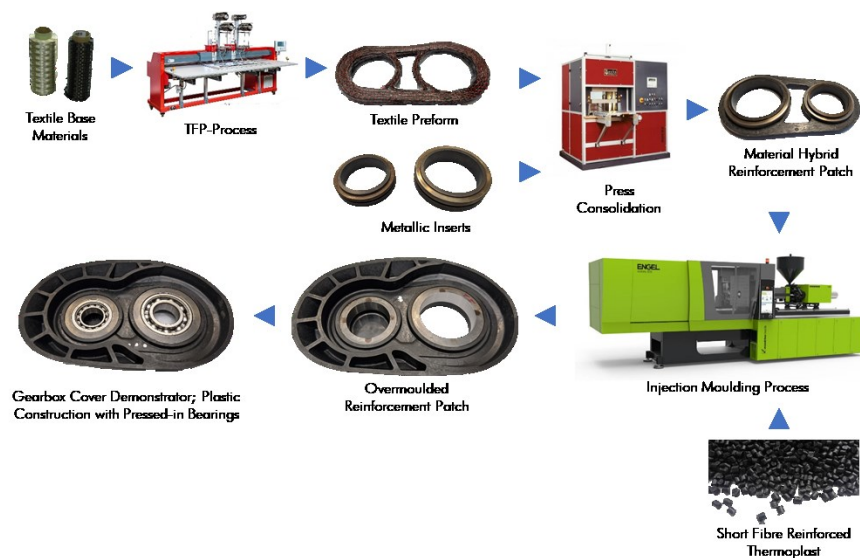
Process chain for manufacturing the gearbox cover consisting of short fibre reinforced thermoplastic and integrated hybrid material patch based on endless fibres on a test specimen level
